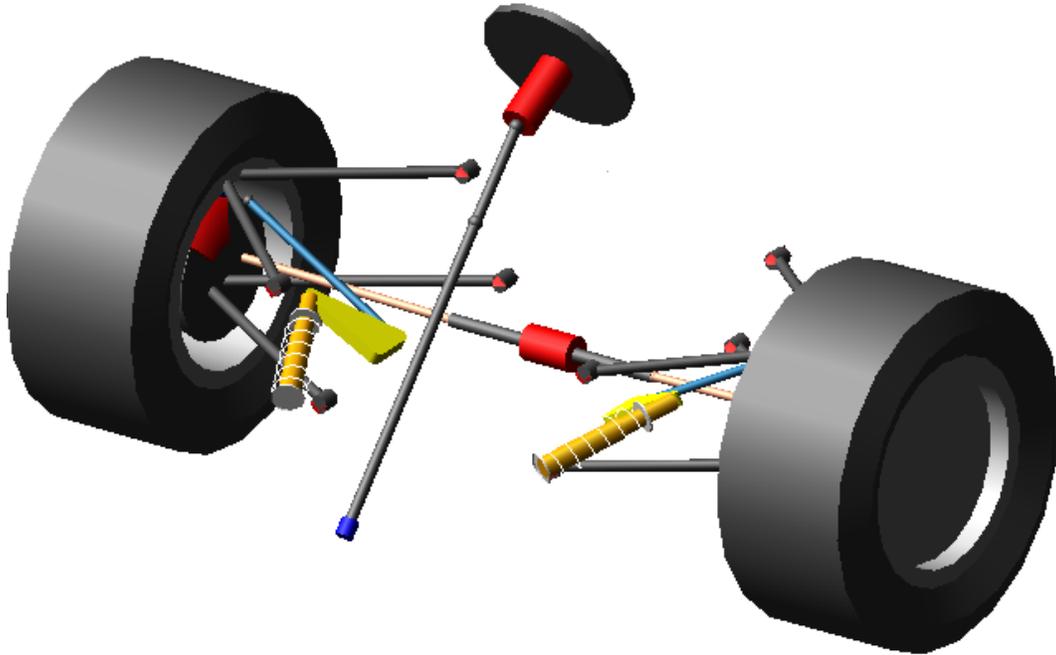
Front Suspension Assembly, complete with steering subassembly and brakes
